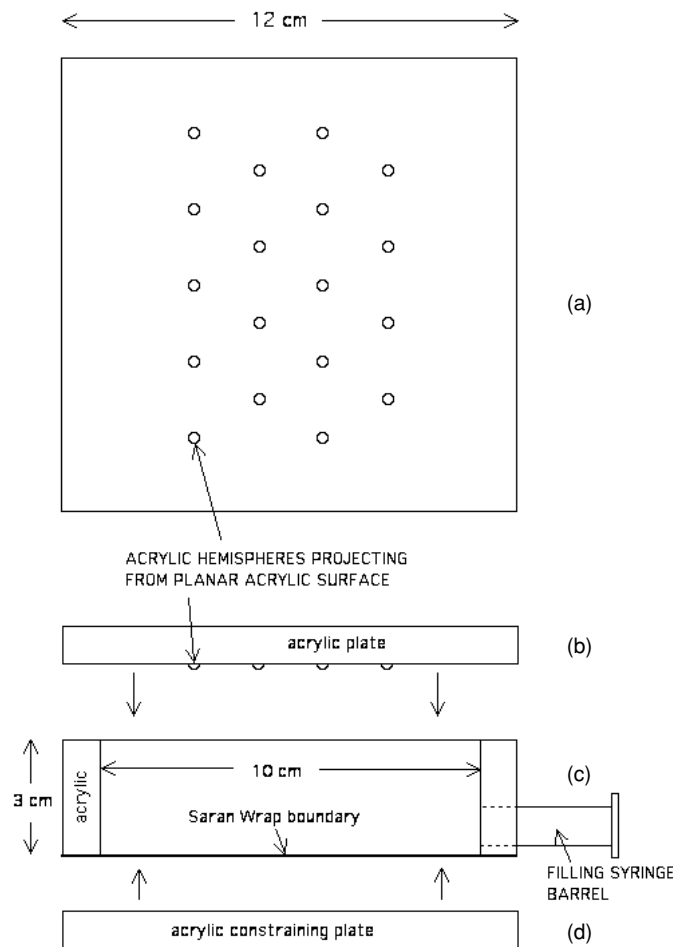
Mould parts for forming background section A (figure 2) of the phantom. A frontal view (a) and side view are shown of an acrylic plate with an array of equal diameter acrylic hemispheres projecting from one surface. A C-clamp is used to clamp that acrylic plate to the second part of the mould (c) along with bottom constraining plate (d) to define section A.
